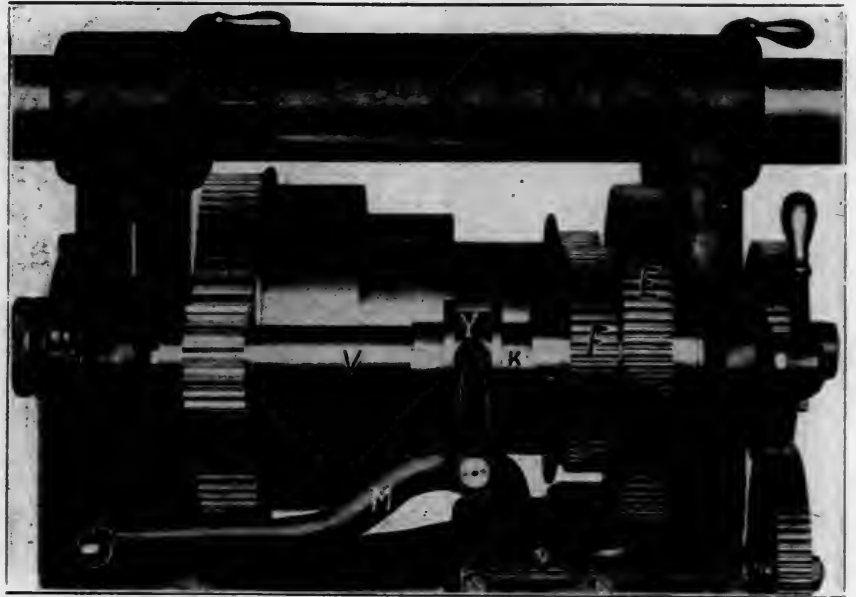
VIEW OF DOUBLE BACK-GEAR ATTACHMENT, SHOWING HANDLE FOR OPERATING THE FRICTION CLUTCHES.
